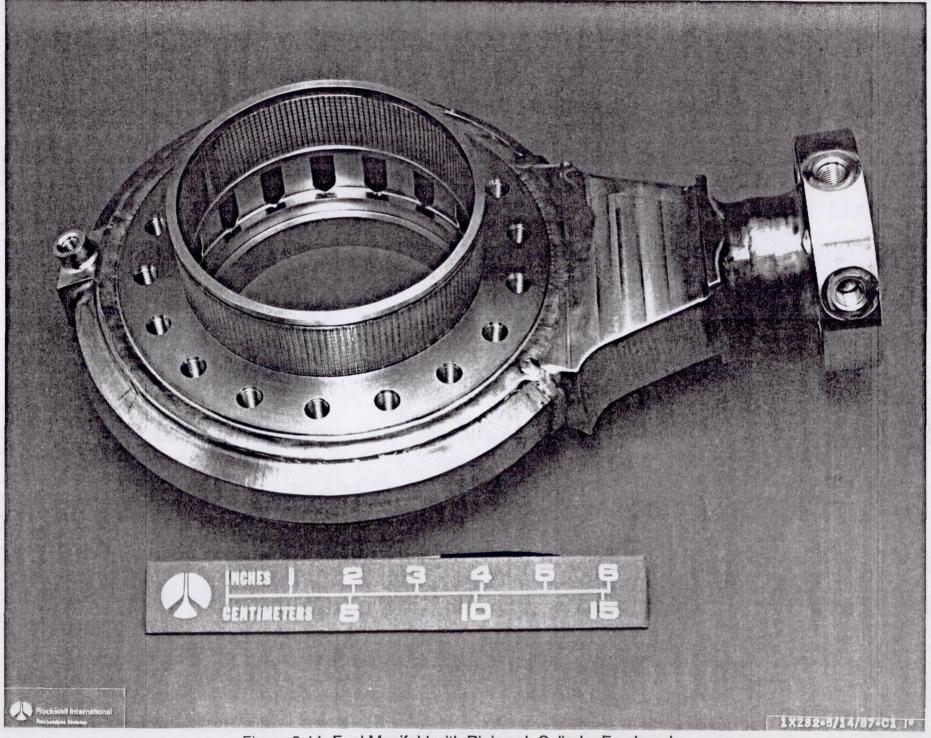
Fuel Manifold with Rigimesh Cylinder Emplaced
